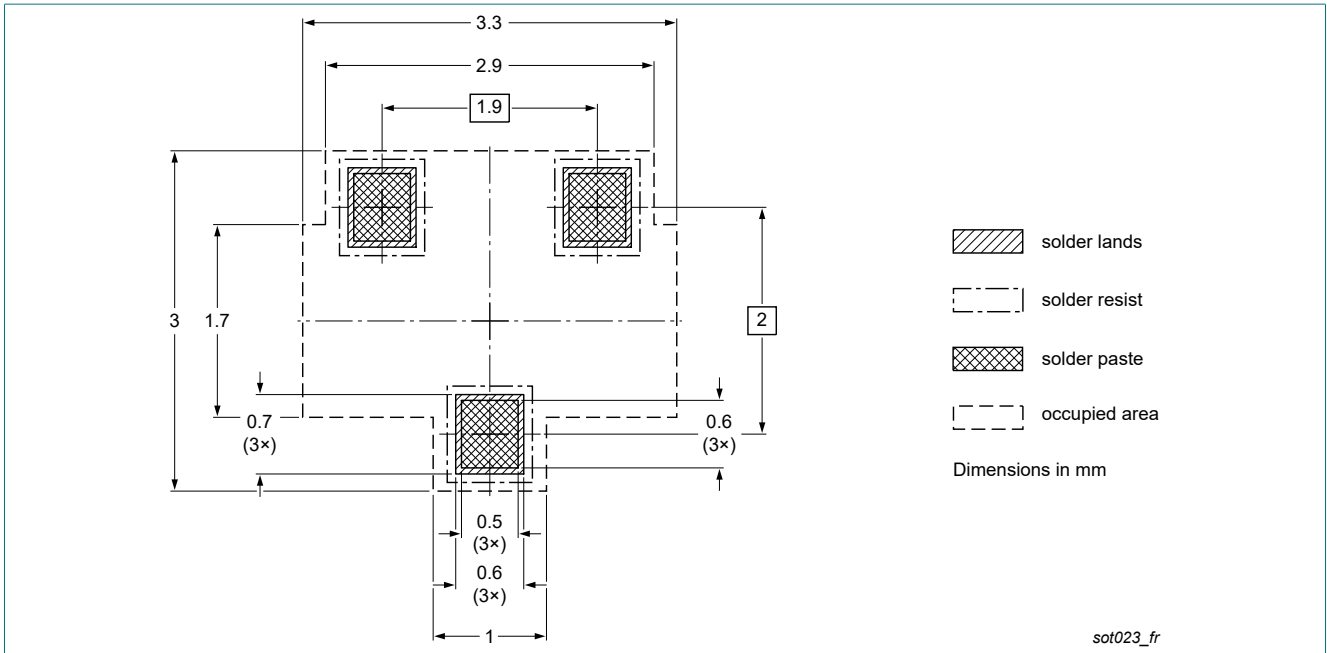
Reflow soldering footprint SOT23 (TO-236AB)
